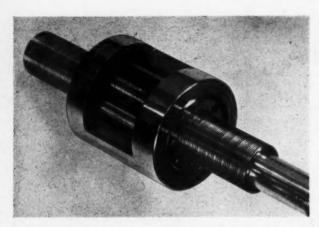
A typical Helicoidal Bearing is here shown with the nut cut away, to expose some of the rollers
